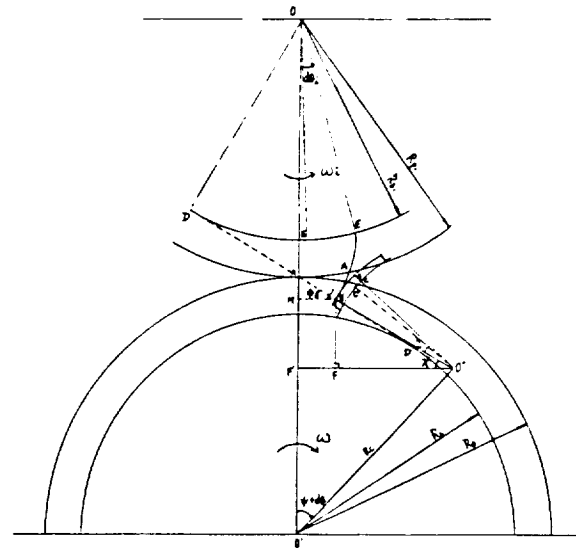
(b) Composite Gear Rotates $d\theta$ when Involute Gear Rotates $d\theta_i$
